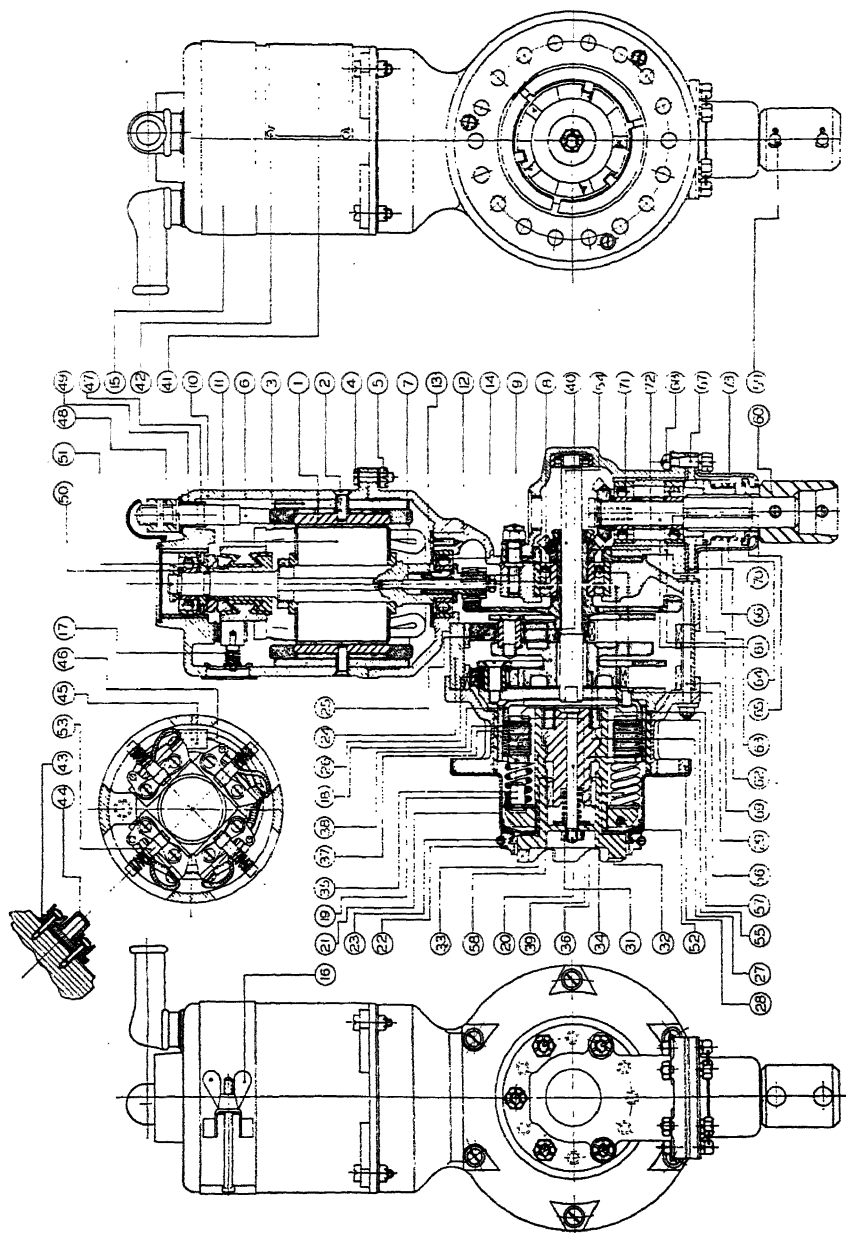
SECTIONAL DRAWING OF ROTAX-ECLIPSE N3EM STARTER
